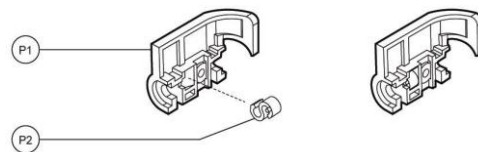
Mounting the Stand Up Hinge Spring into the Stand Up Hinge
